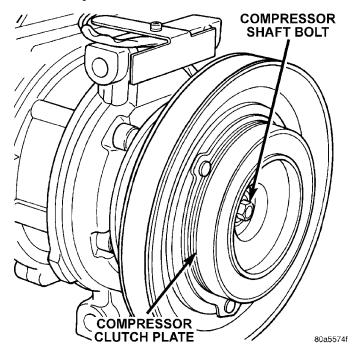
Compressor Shaft Bolt and Clutch Plate
